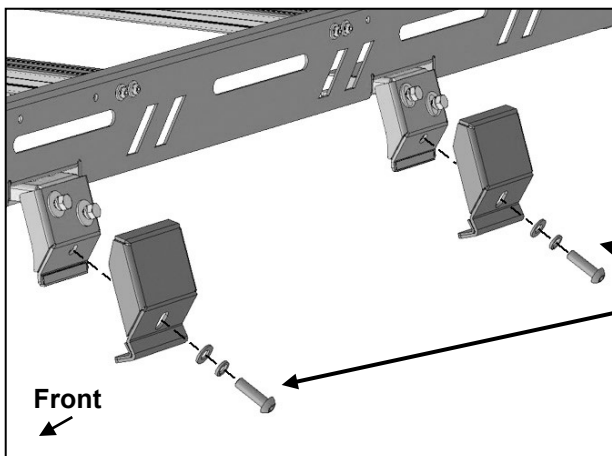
Attach Front Bracket Clamp Cover to driver/left front Inner Mounting Bracket
